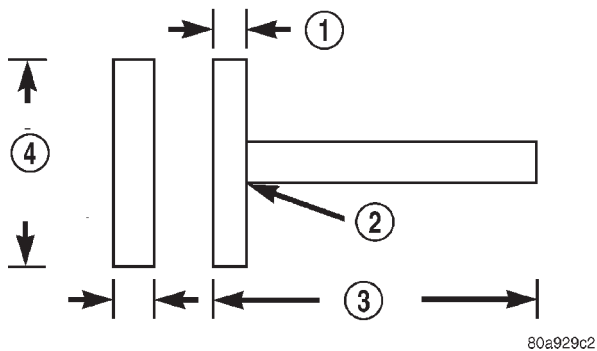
Tool For Cigar Lighter / Power Outlet Removal
